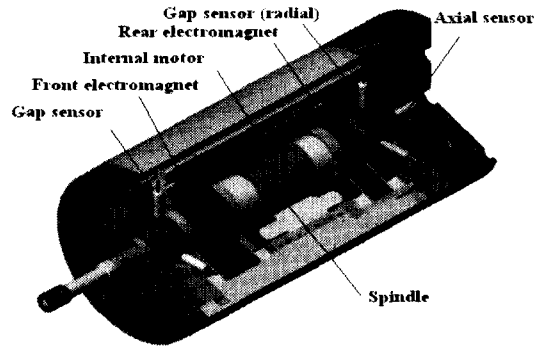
High Speed Spindle Unit with Magnetic Bearings
